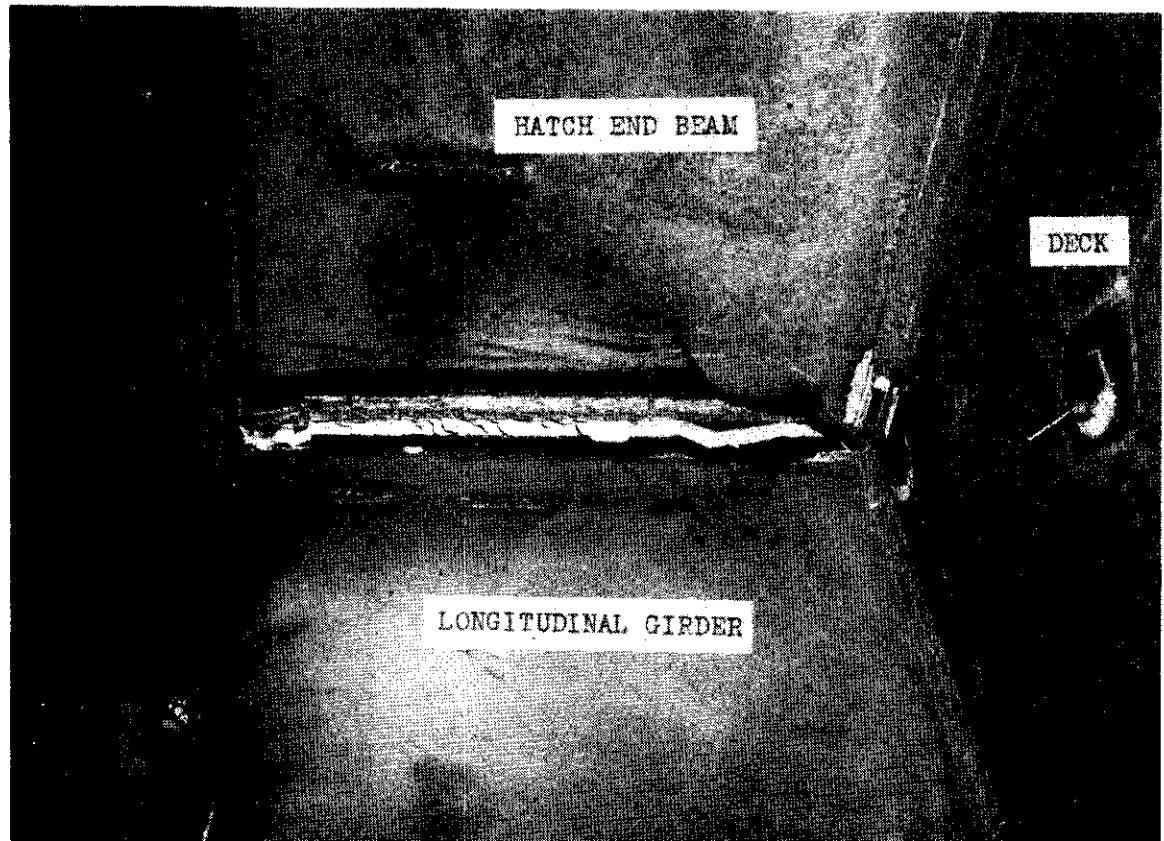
Specimen 32: View from below deck, inboard and forward of hatch end beam
